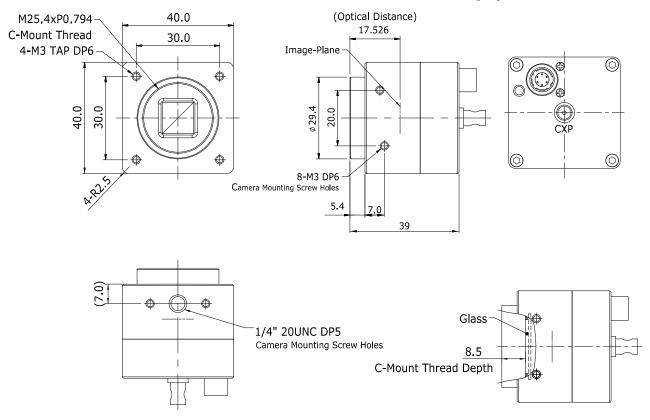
VC-4MX-M144F00 Mechanical Dimension
